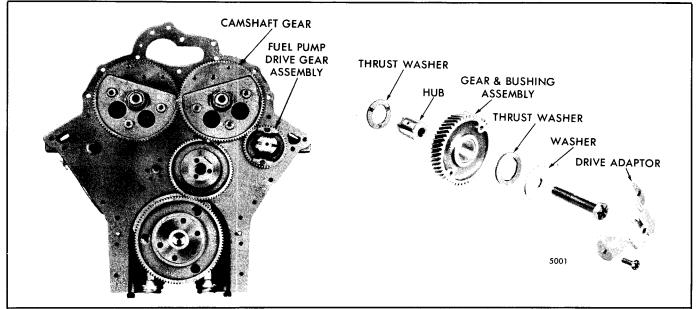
Typical Fuel Pump Drive Gear Mounting and Details (V-Type Engine)
